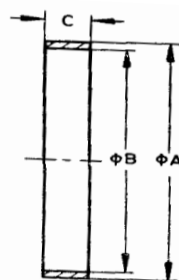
'WF' DESIGN DOUBLE TUBE CORE BARREL — INNER TUBE EXTENSION SPACER
